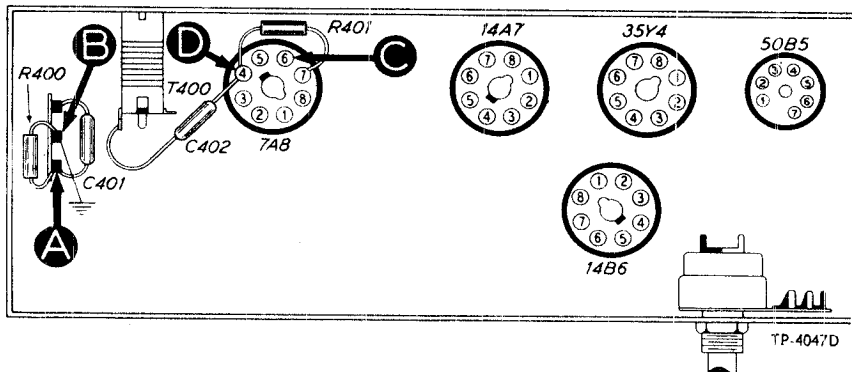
BOTTOM VIEW, SHOWING SECTION 4 TEST POINTS
